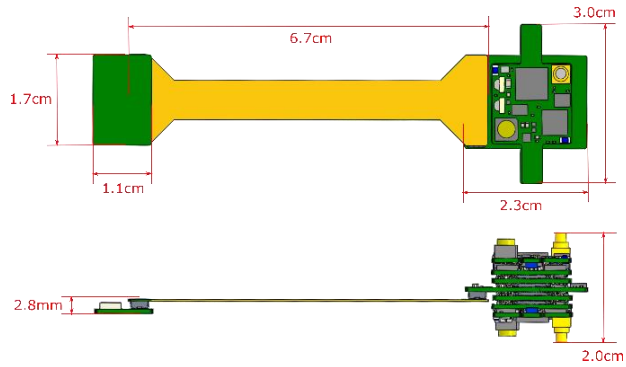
Dimensions of the wireless headstage and connectors. The green component on the left represents a small PCB containing a ZIF connector to the neural probe and a Molex connector to the flexible PCB (orange component). The component on the right represents the wireless headstage
